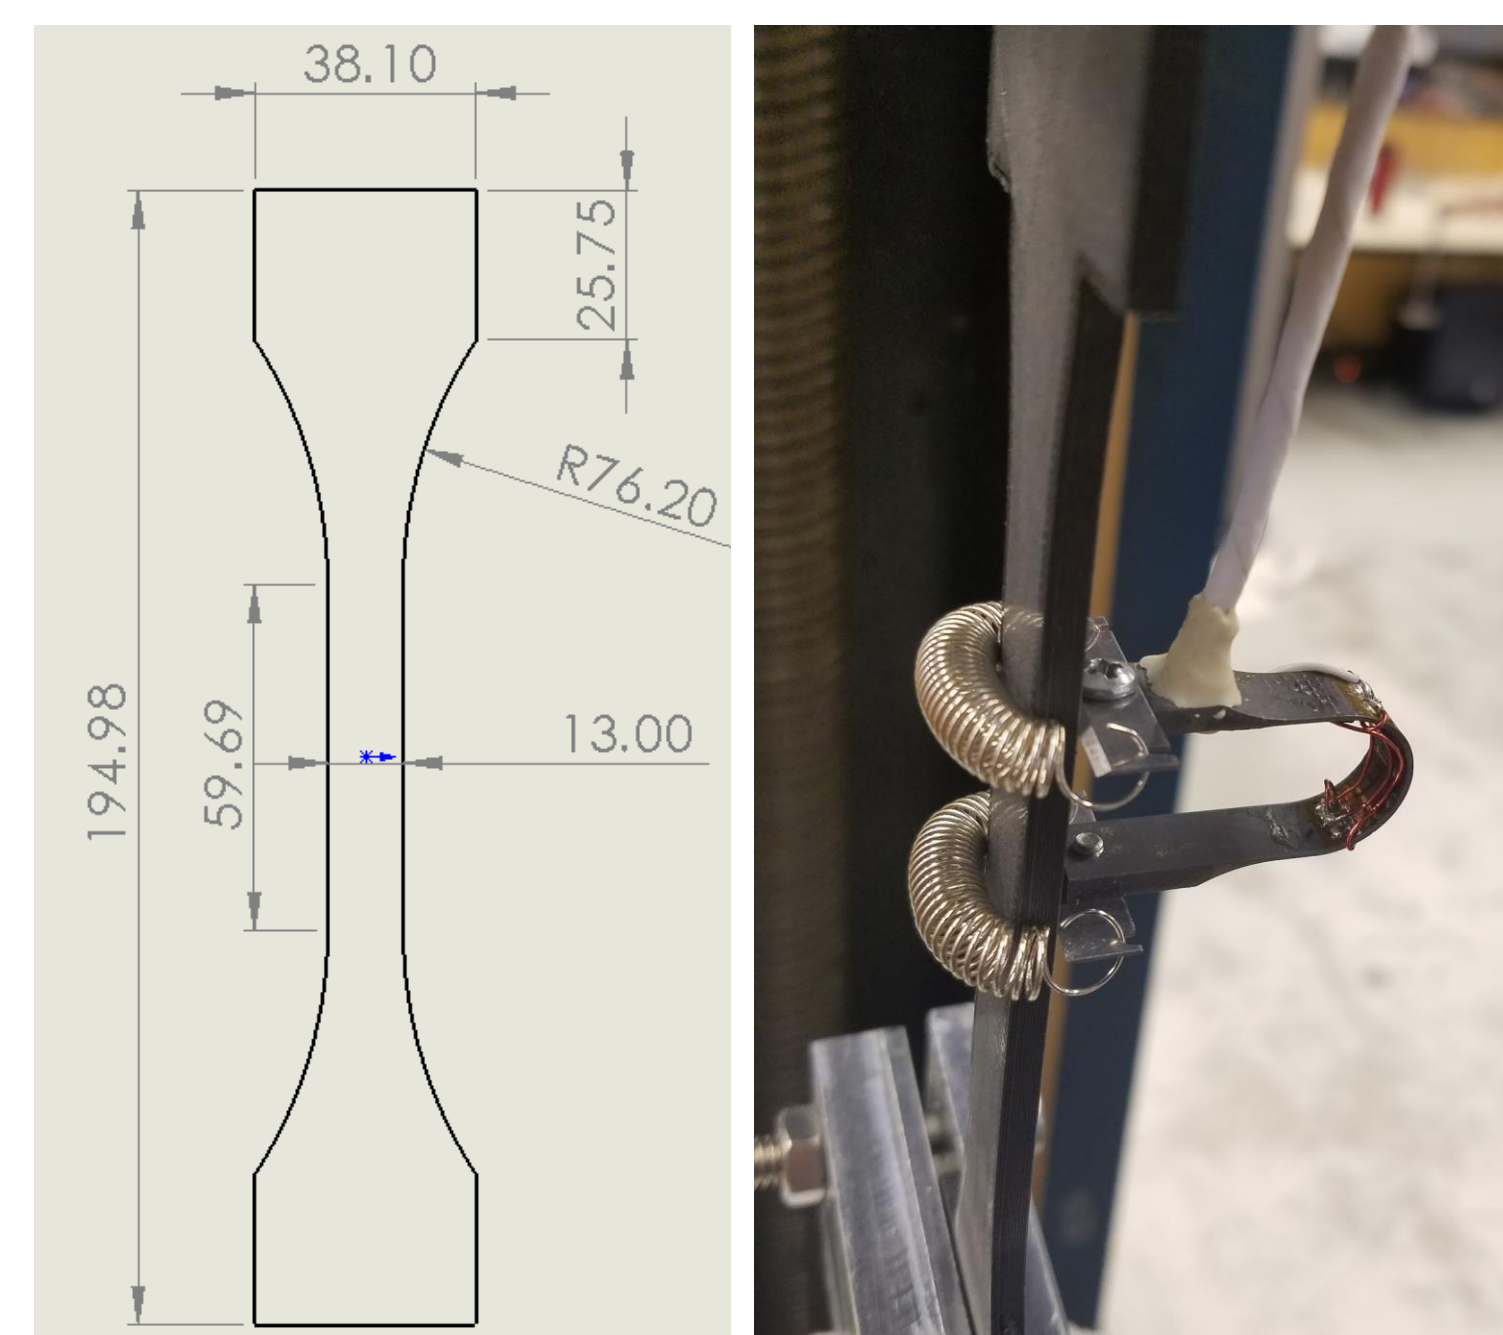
Testing sample dimensions (left) and linear extensometer setup on sample (right). All dimensions are in millimeters.
